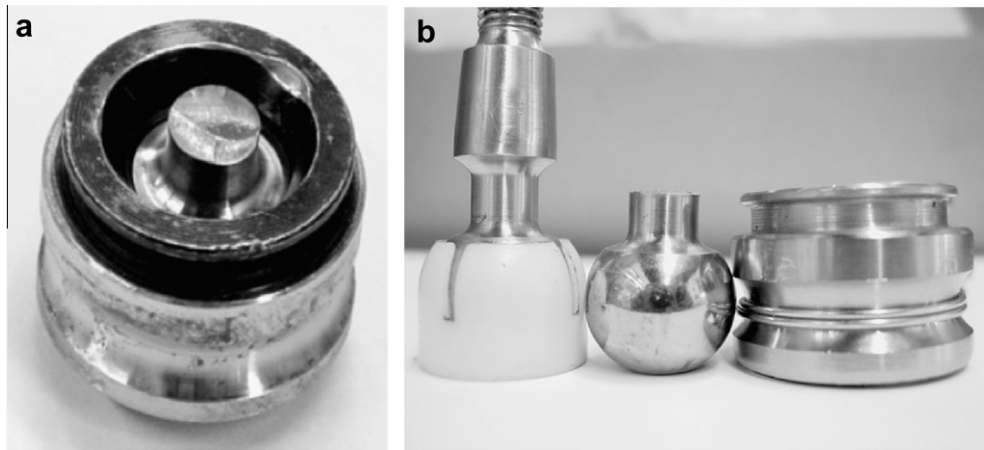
Ball joint element. (a) Failed ball joint in the cage. (b) Failed and new ball joints out of the cage.
